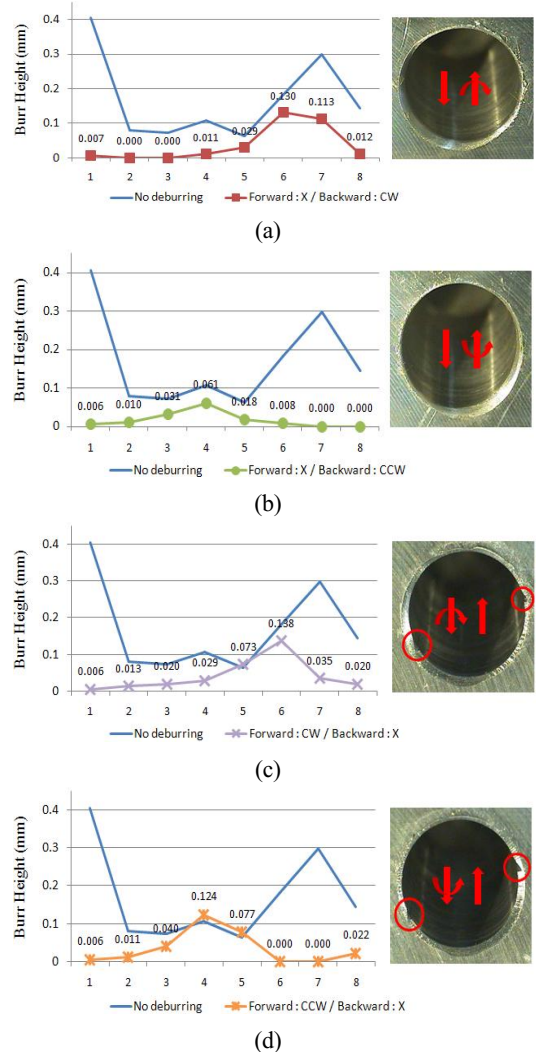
Deburring result for the burr on exit surface with 15° exit angle when deburring tool rotates only one direction during entering or returning
